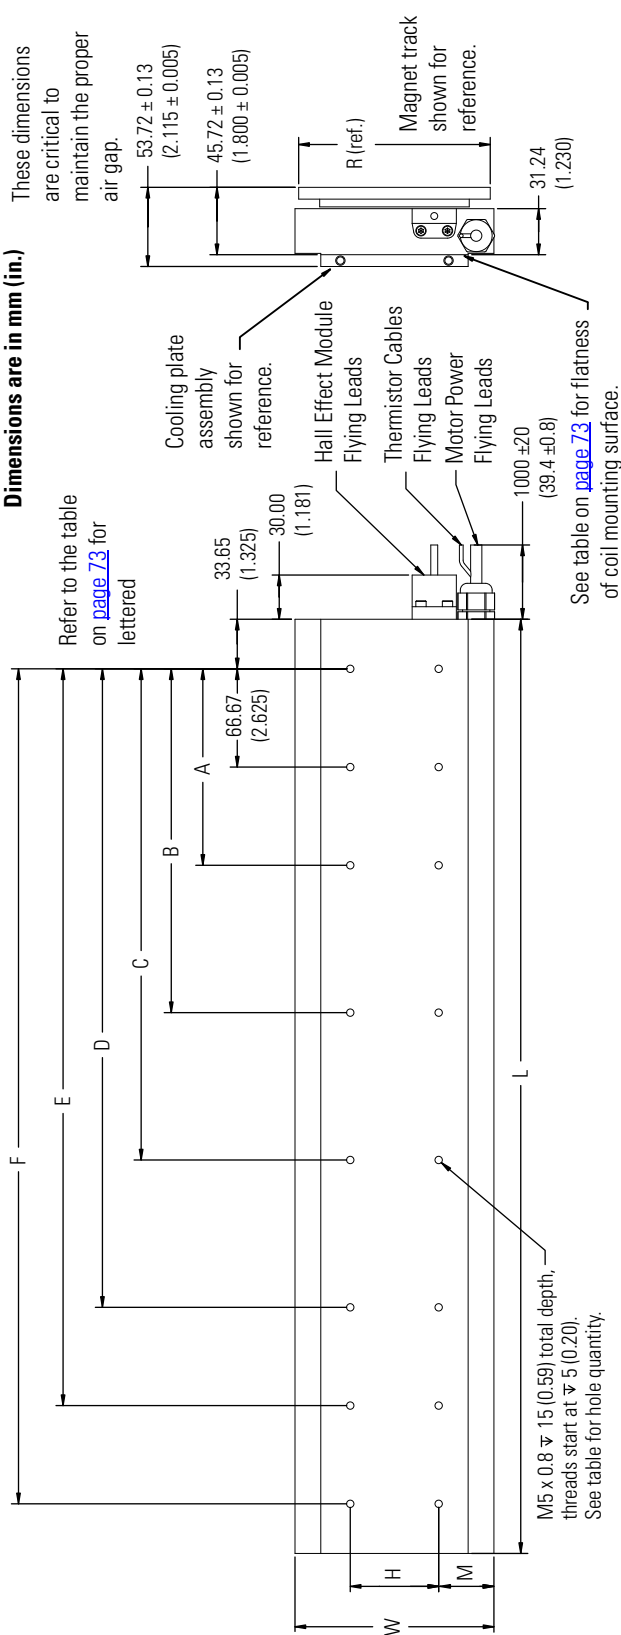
LDC-Series Iron Core Linear Motor Coil Dimensions (LDC-C030/050/075/100-xxx-xHT11) with Connectors
